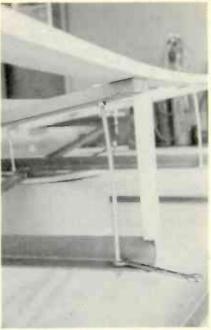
ADJUSTMENT BOLTS are set for proper spacing between vertical frame rib and wood strip. Here a 7¼-inch spacer aids adjustment at 72-inch point.
